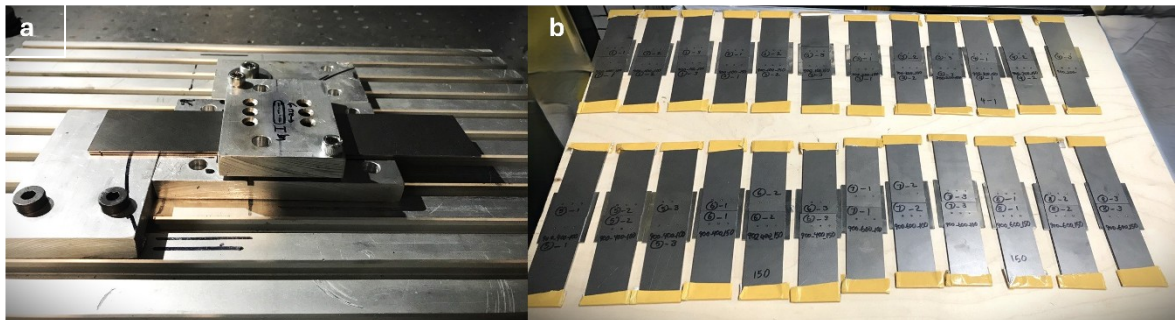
(a) Clamping (b)Welded samples for tensile test
